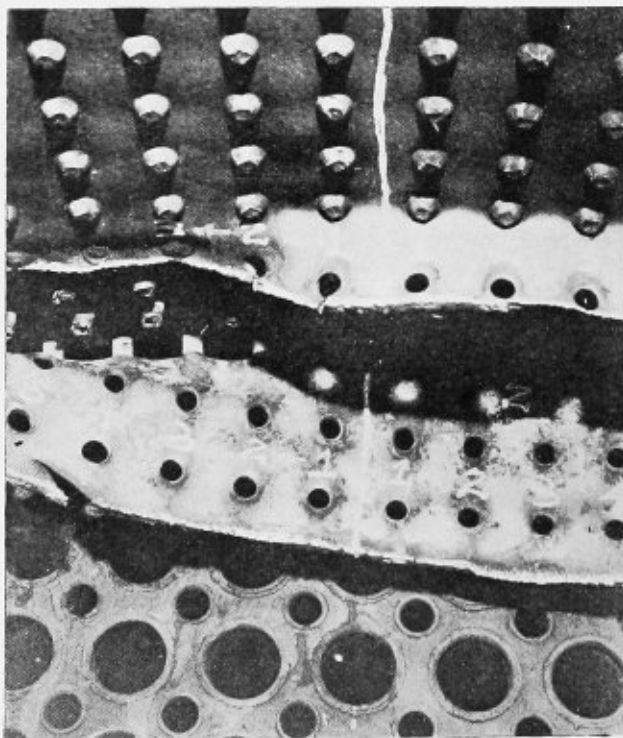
Typical Failure Along Transverse Welded Seam of Crown Sheet
